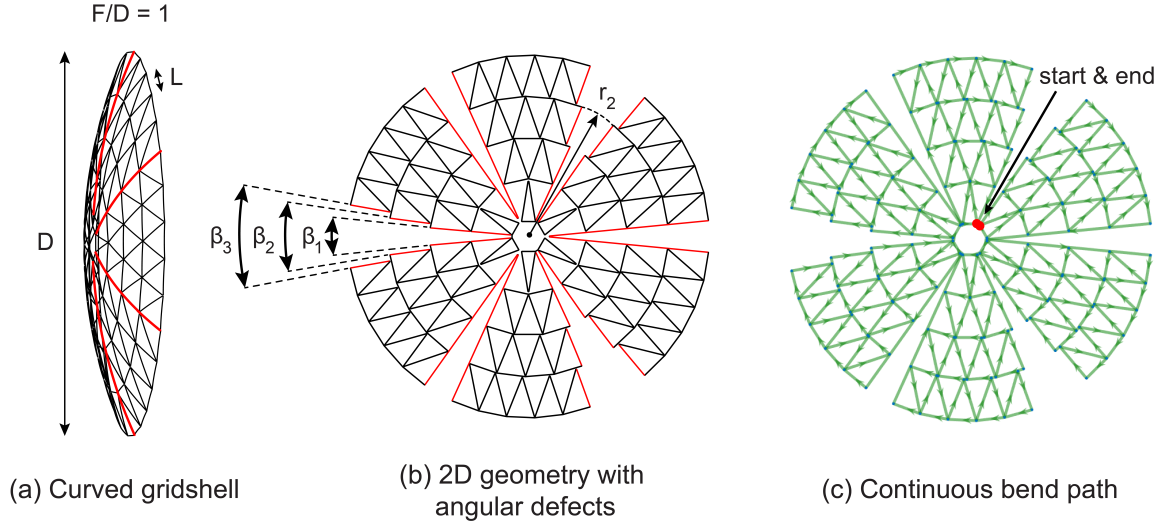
Geometry and bend path for a curved gridshell fabricated with Bend-Forming. First the 3D geometry is flattened using angular defects ( $\beta_i$ ). Then a continuous bend path is computed through the 2D geometry and converted to machine instructions for fabrication.
